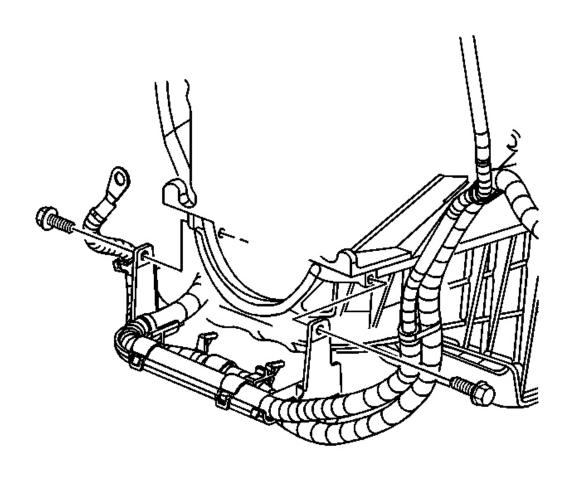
View Of Battery Cable Bracket Bolts Courtesy of GENERAL MOTORS CORP.
